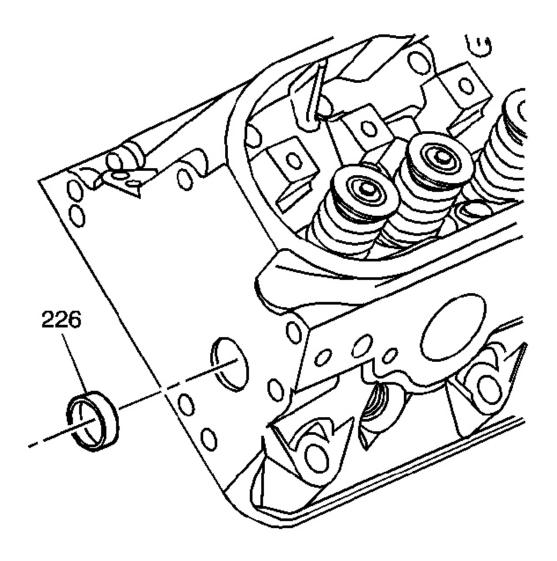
View Of Cylinder Head Expansion Plugs Courtesy of GENERAL MOTORS CORP.
